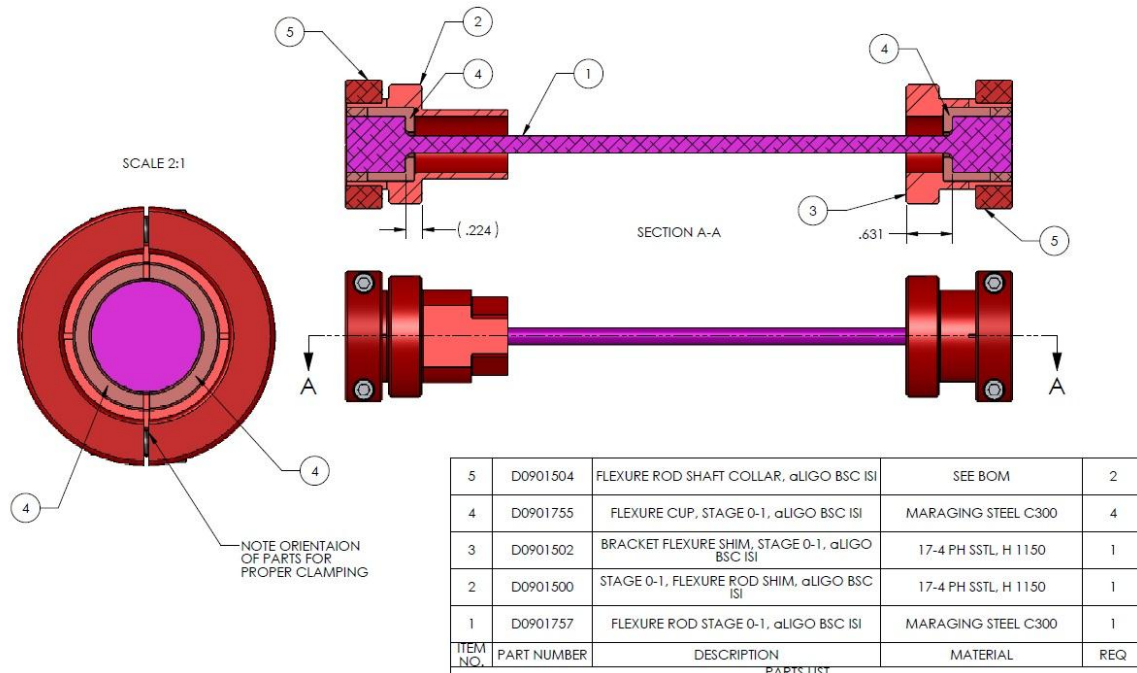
D0902103 Stage 0-1 Flexure Rod Assembly
